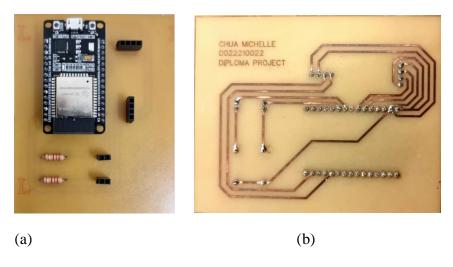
Assembled PCB of the System: (a) Top View, and (b) Bottom View
